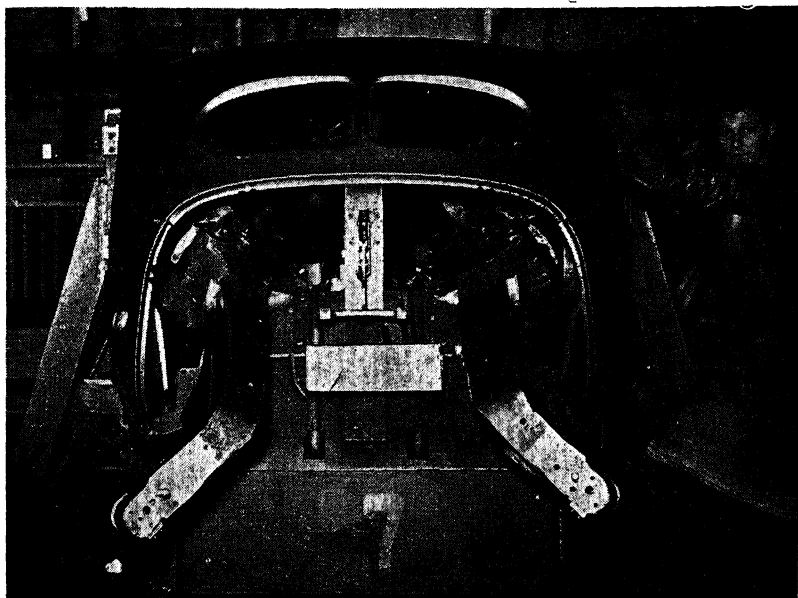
Automobile body top being removed from welding fixture.
